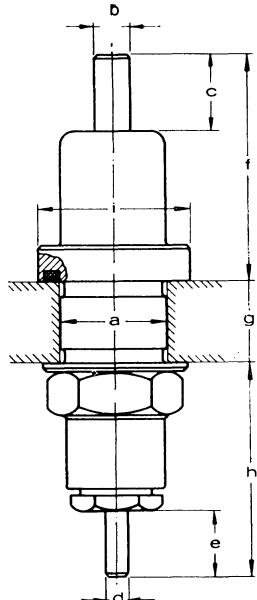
Dimensions of shaft seals supplied by Balzers⁴⁴⁴ (Table 5.6)
